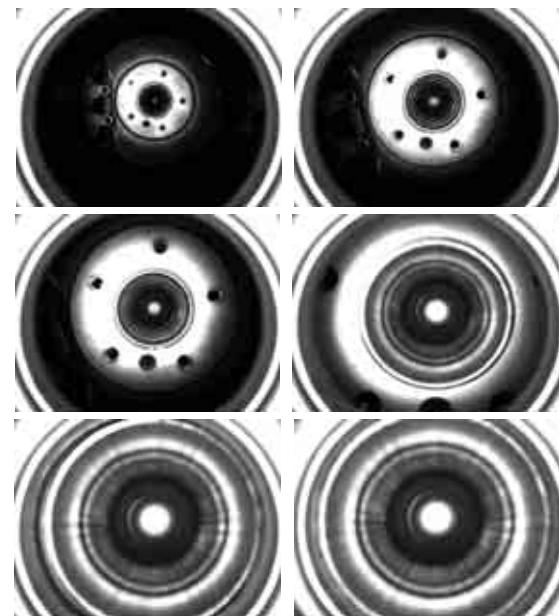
Images of the robot mounted camera while approaching the wheel rim
